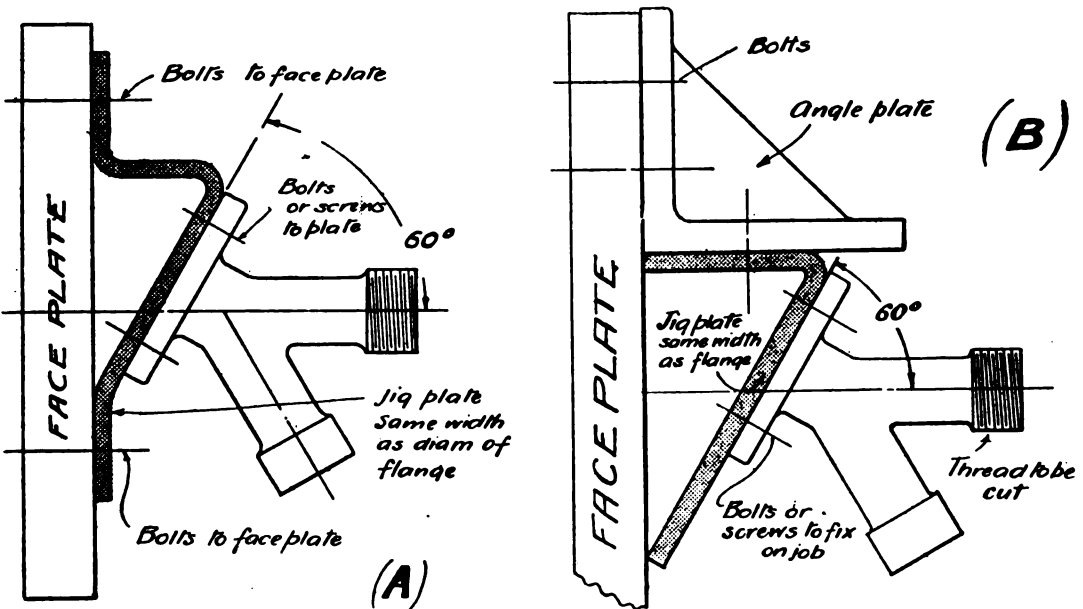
SHOWING TWO METHODS OF CUTTING THE UNION THREAD ON Y-PIPE CONNECTIONS.
